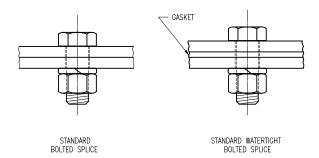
Bolted joints through (a) standard, and (b) watertight.
